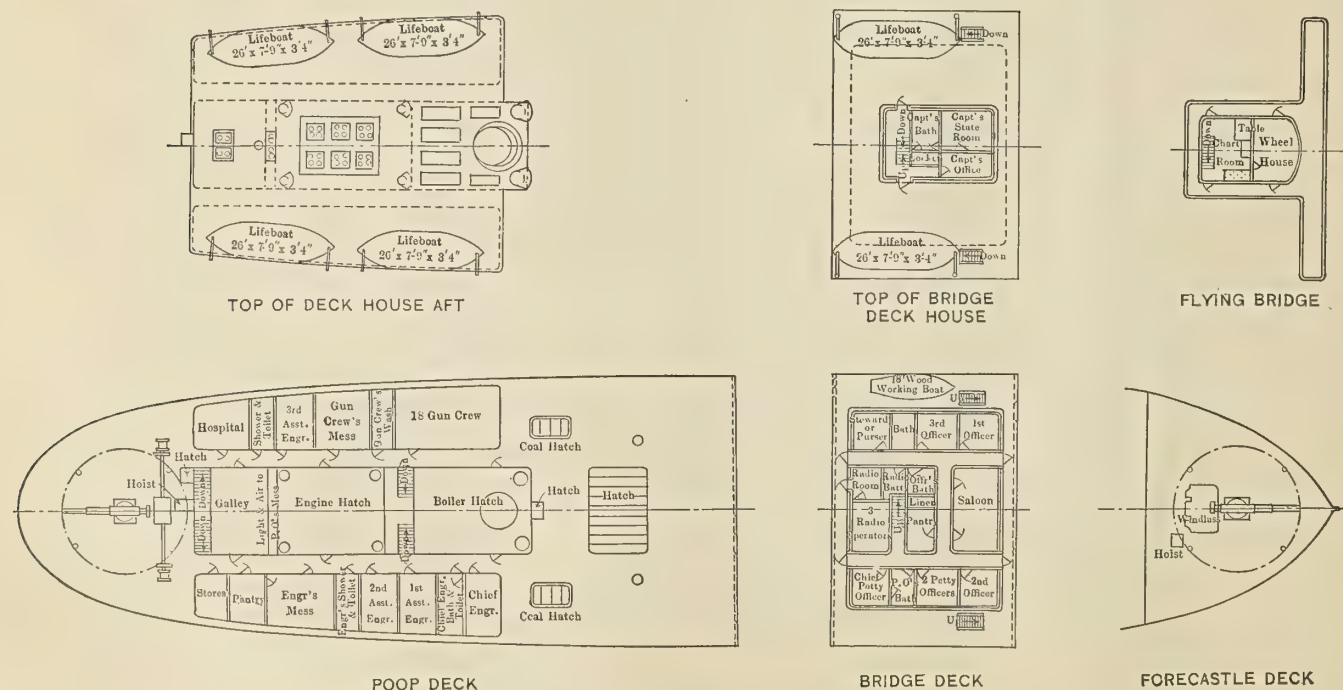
Plan of Poop, Bridge and Forecastle Decks
